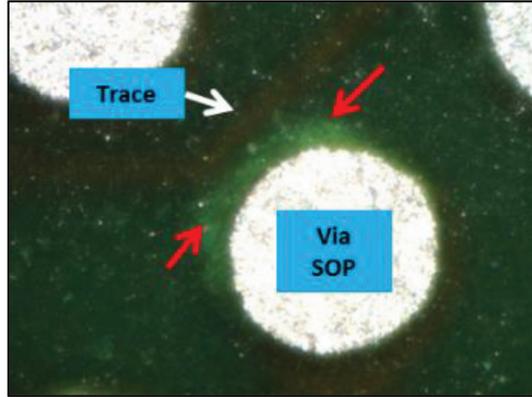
Optical image of via solder-on-pad (SOP) with solder extrusion.
